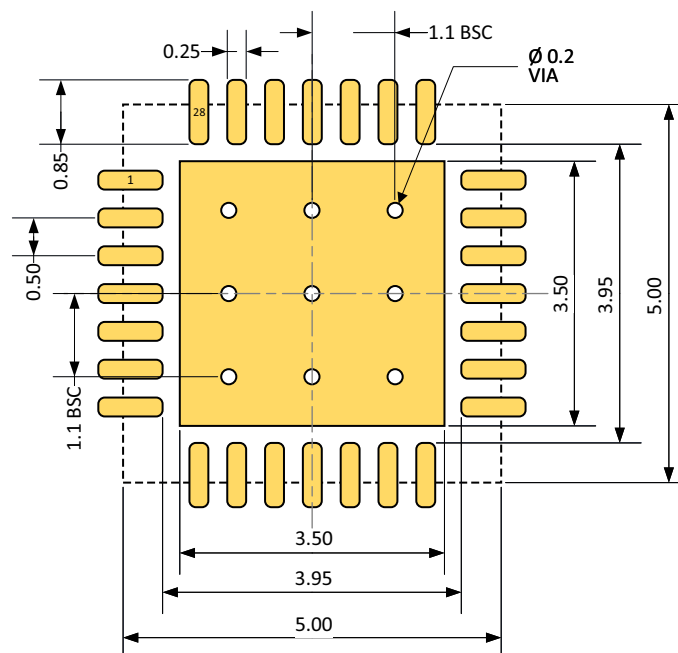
Recommended board layout for QFN 28-pin 5x5mm (all dimension in mm)
